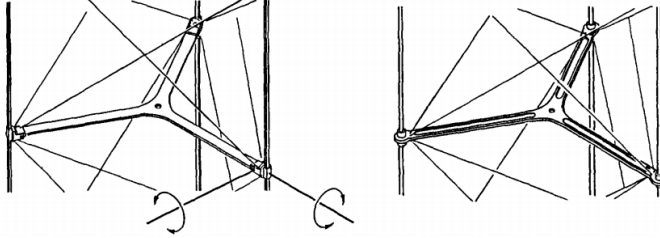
left: classic design with mechanical hinges at the joints, right: Hingleless design incorporating flexible battens [45]
